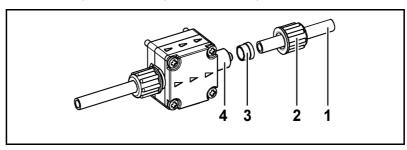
4/6 hose / clamp ring connection fitting (FEM)
